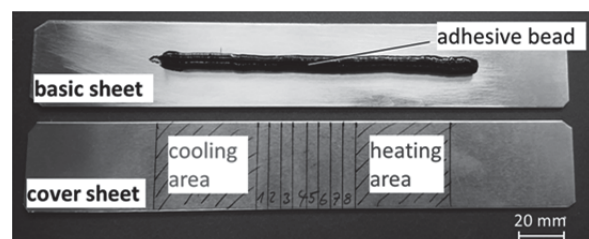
Aluminum sheet with adhesive bead (upper part) and cover sheet (lower part) before assembling the sandwich compound. On the cover sheet the areas for cooling (left side) and heating (right side) are marked. The specimen is prepared for a tool distance of 47 mm.
